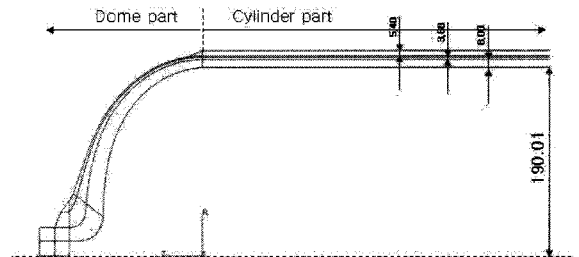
Cross section and dimensions of Type3 composite cylinder.
